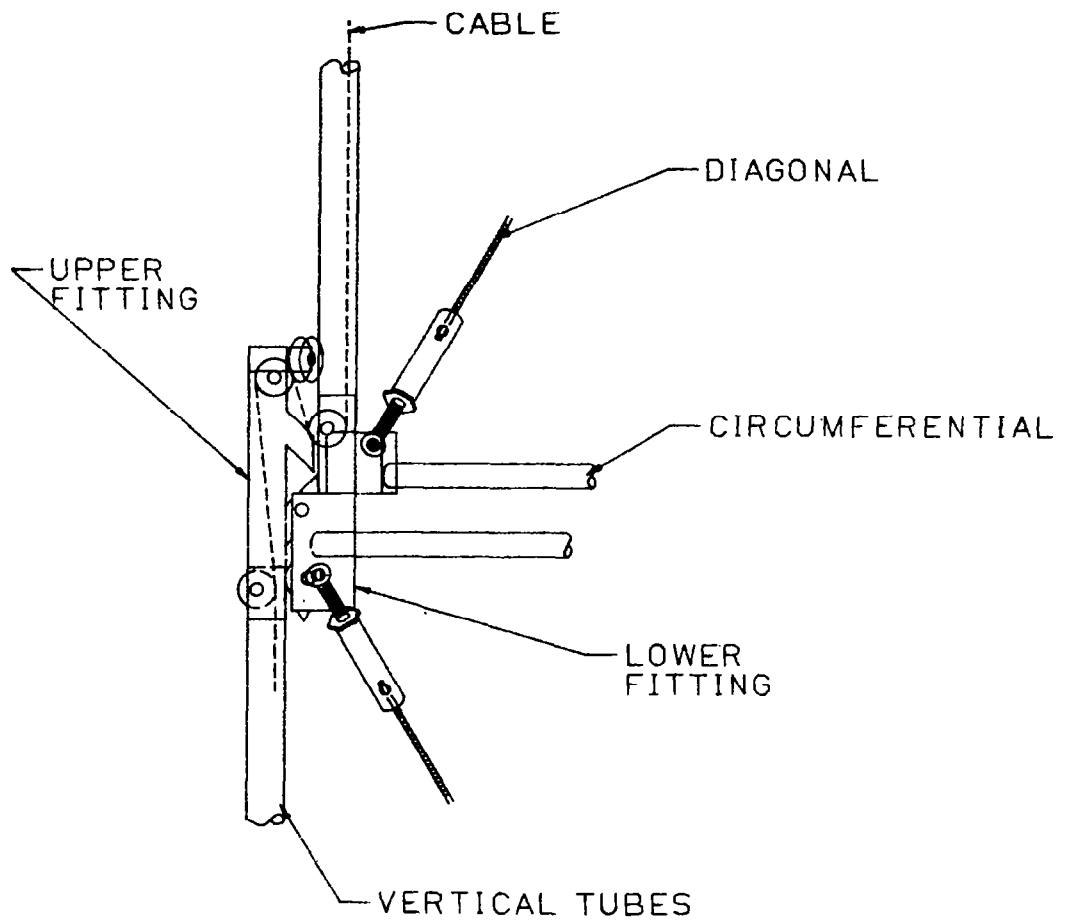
15-Meter Model Deployed Upper and Lower Mast Fittings
